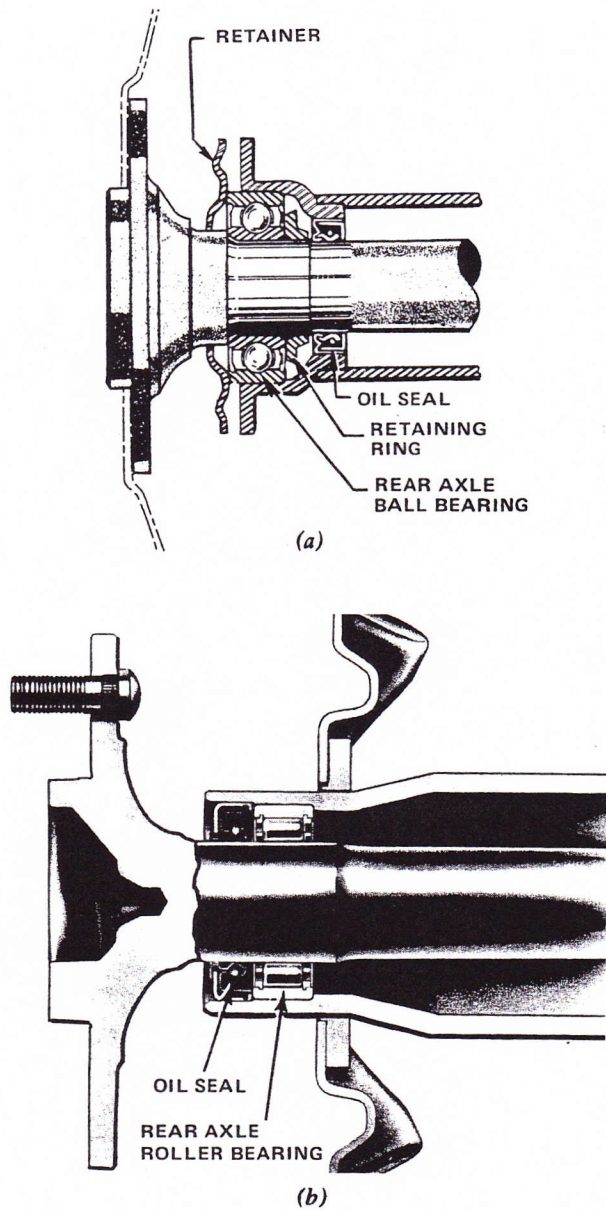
Two Types of Rear Wheel Axle Bearings.
